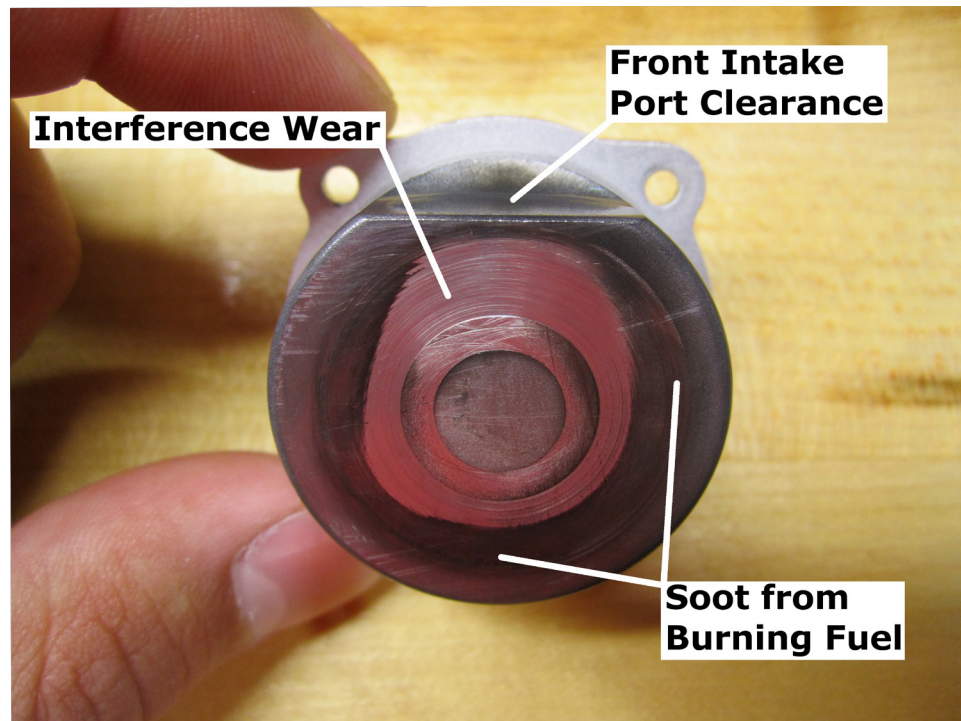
Internal side of front engine case after Bosch glow plug adapter testing
